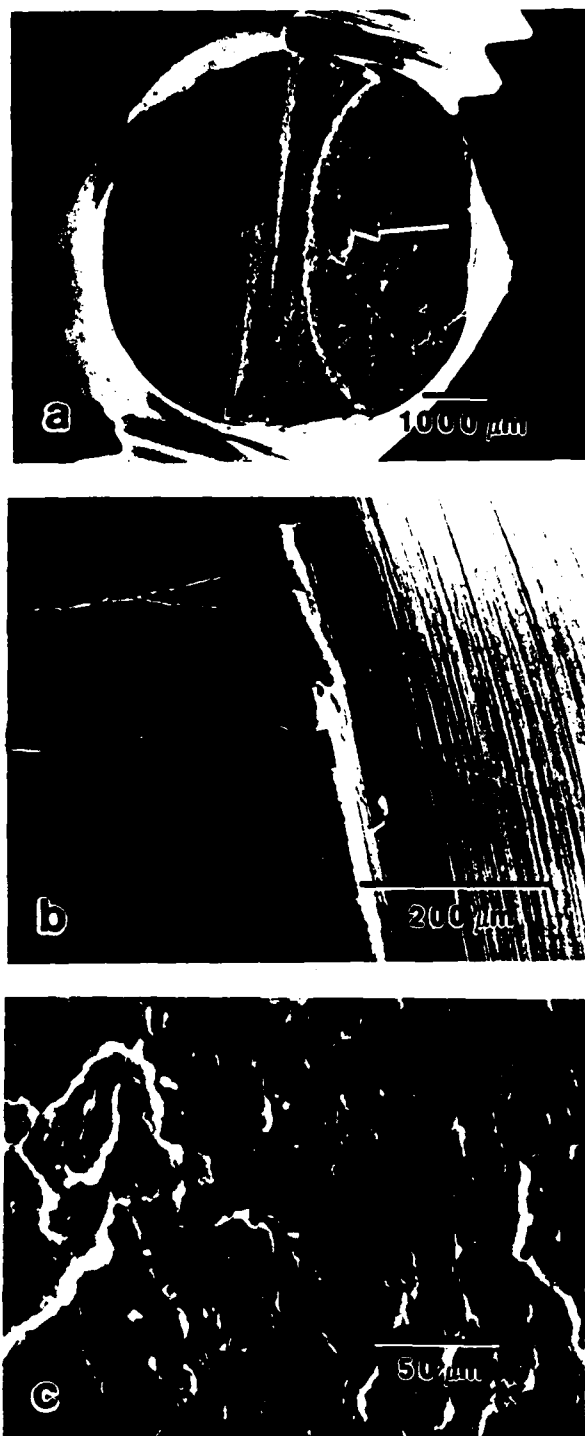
SEM micrographs of fatigue-tested specimens of extruded Al-4Be ribbon showing a) Fatigue crack in specimen #3 exposed by cutting the backside of the guage section, relative to the crack, and fracturing the remaining portion of the material; b) Crack initiation site in specimen #4, and c) Fatigue striations in region indicated by arrow in "a".
